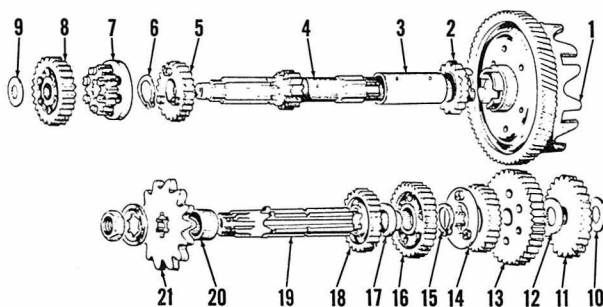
Exploded view typical of transmission gears and shafts.
